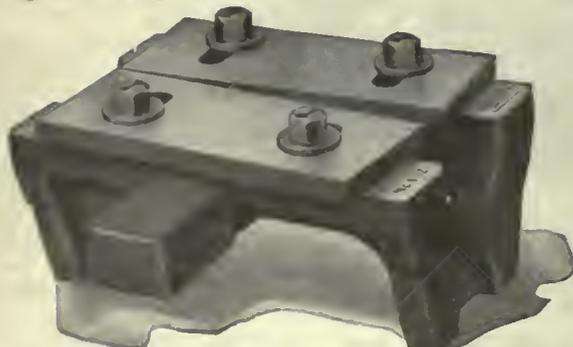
A SEPARATE VIEW OF THE TAPER TEST GAUGE.
